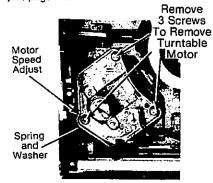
Turntable Drive Motor Removal Reduction Gear Assembly Removal
